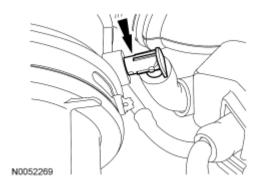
Locating Engine Breather Courtesy of FORD MOTOR CO.
